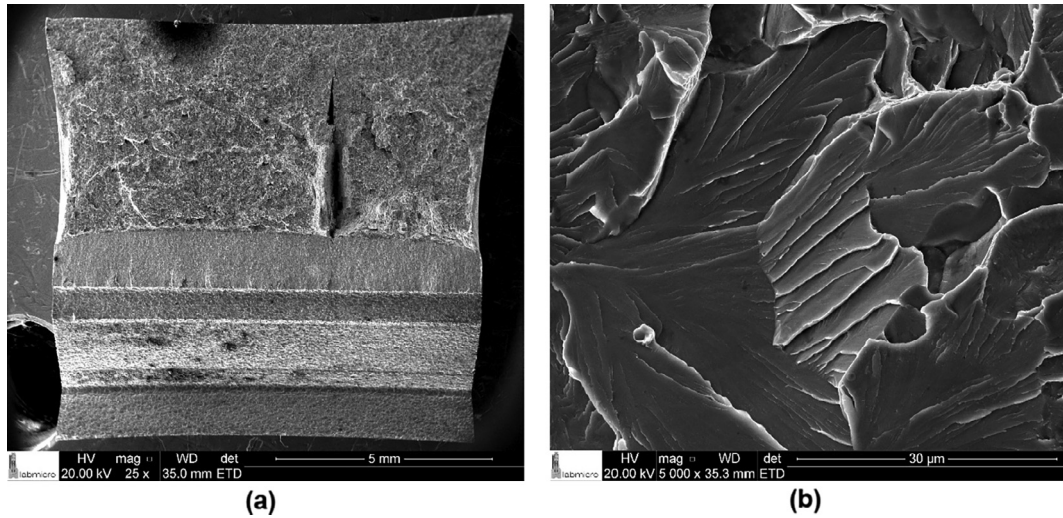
(a) Typical fracture surface for the PCVN specimen with  $S/W = 6$  at  $T = -20^\circ\text{C}$ . (b) Scanning electron microscopy (SEM) of the fracture surface.
